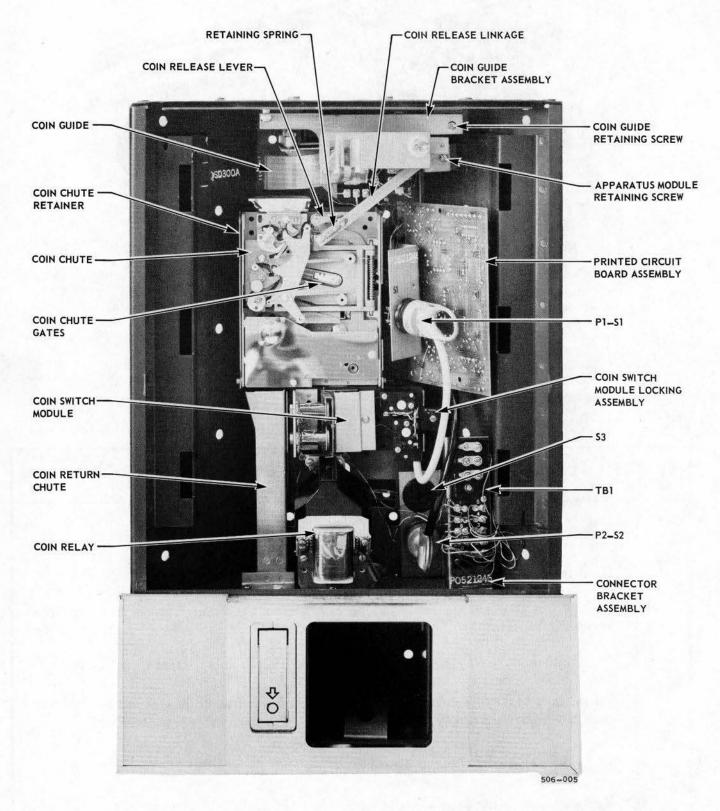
QSD300A and QSD2300A Coin Telephone Set with Door Assembly Removed
